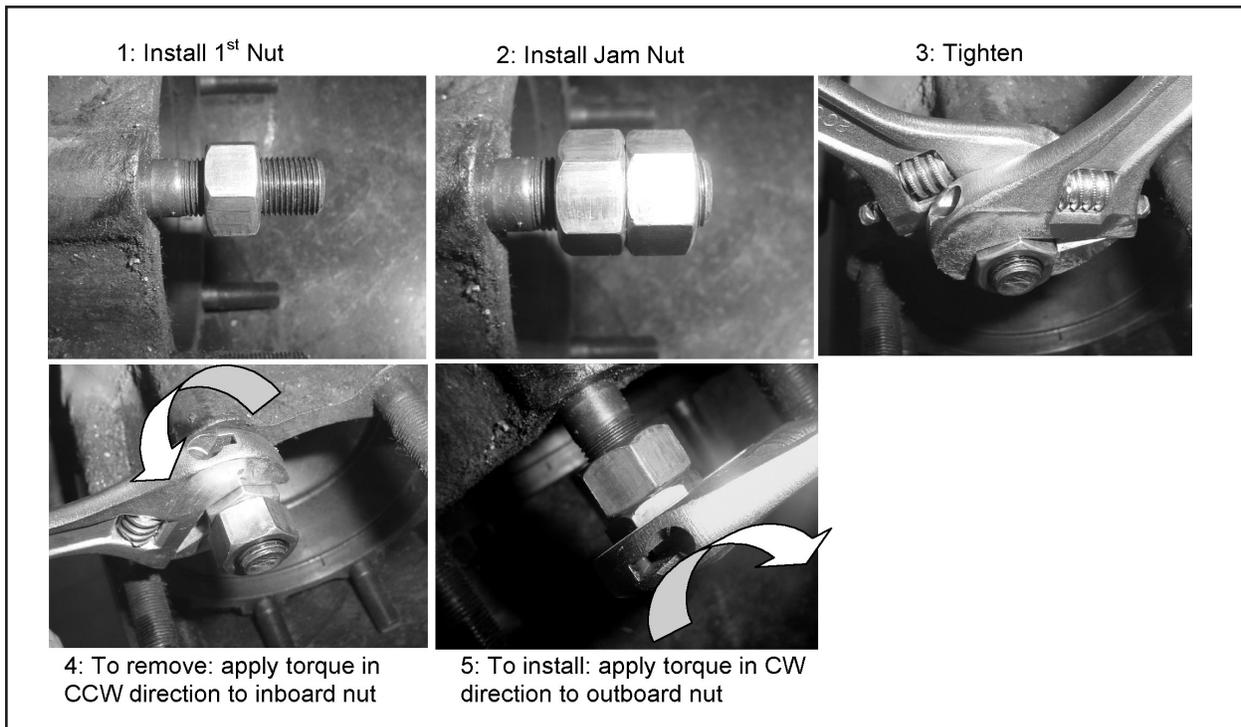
Double-Jam Nut Method for Removal of Externally Threaded Fasteners
